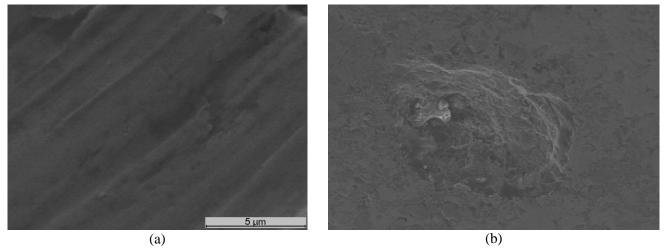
SEM analysis of the fracture surface of a aircraft crankshaft; (a): striations due to cyclic plastic deformations related with fatigue mechanisms; (b): possible forging defect close to the crack initiation region.
